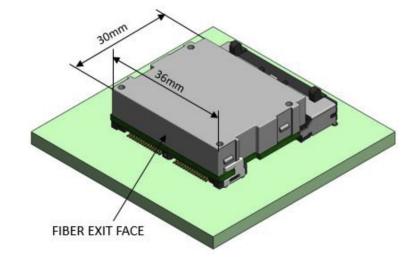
8-Isometric View of x8 Connector Solution Set on the Host PCB
